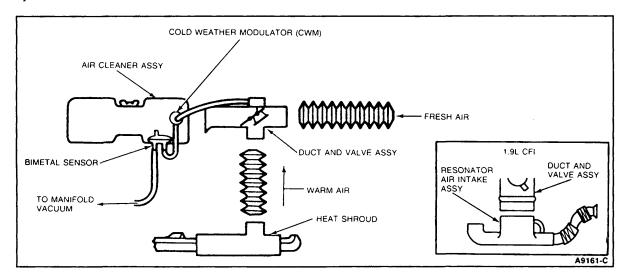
Typical Air Cleaner and Duct System, Carburetor and Throttle Body Applications — 1.9L, CFI, 5.8L (Passenger Car)
